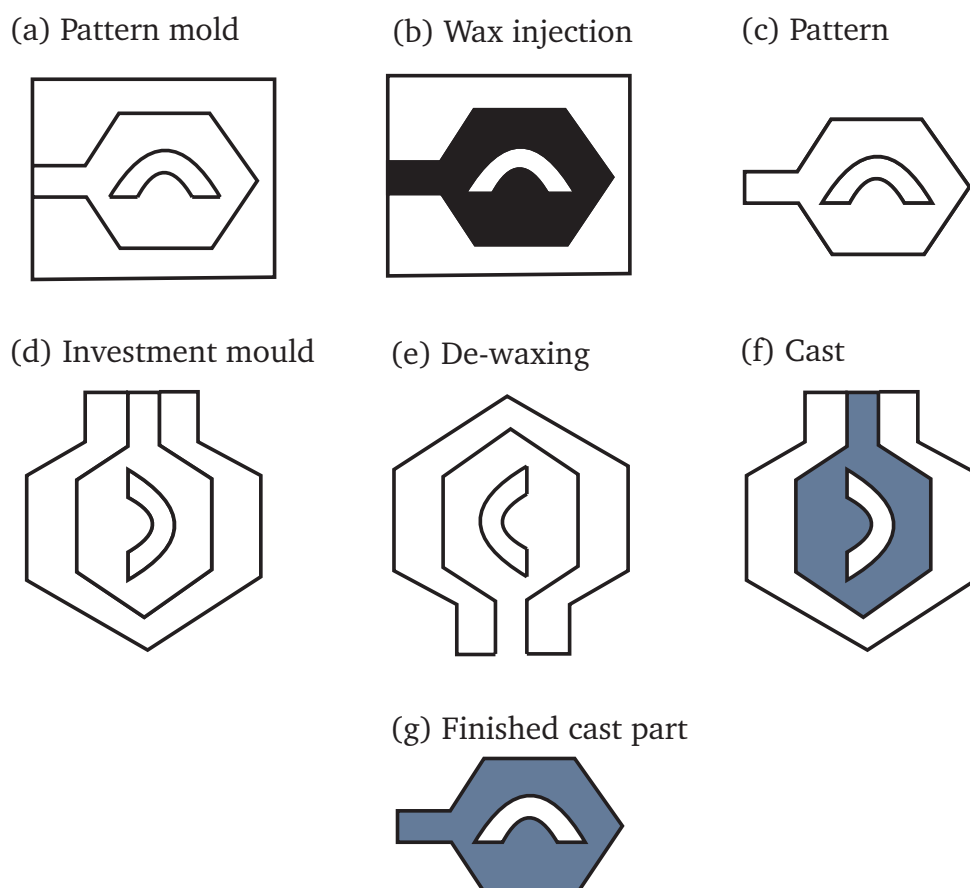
Basic principles of the investment casting process [2]. The pattern mold (a) is used to produce a wax replica of the casting (b & c). This wax replica is subsequently surrounded (invested) with a ceramic slurry (d). To obtain the final cast mold (e) the wax is melted at moderate temperatures and the mold is fired to increase its stability. The melt is then casted into the mold (f). Once the casting is solidified, the mold is removed.
